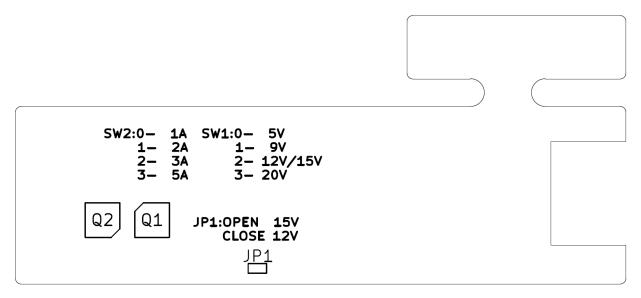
Rev 5 Assembly Drawing Bottom side with component designators
